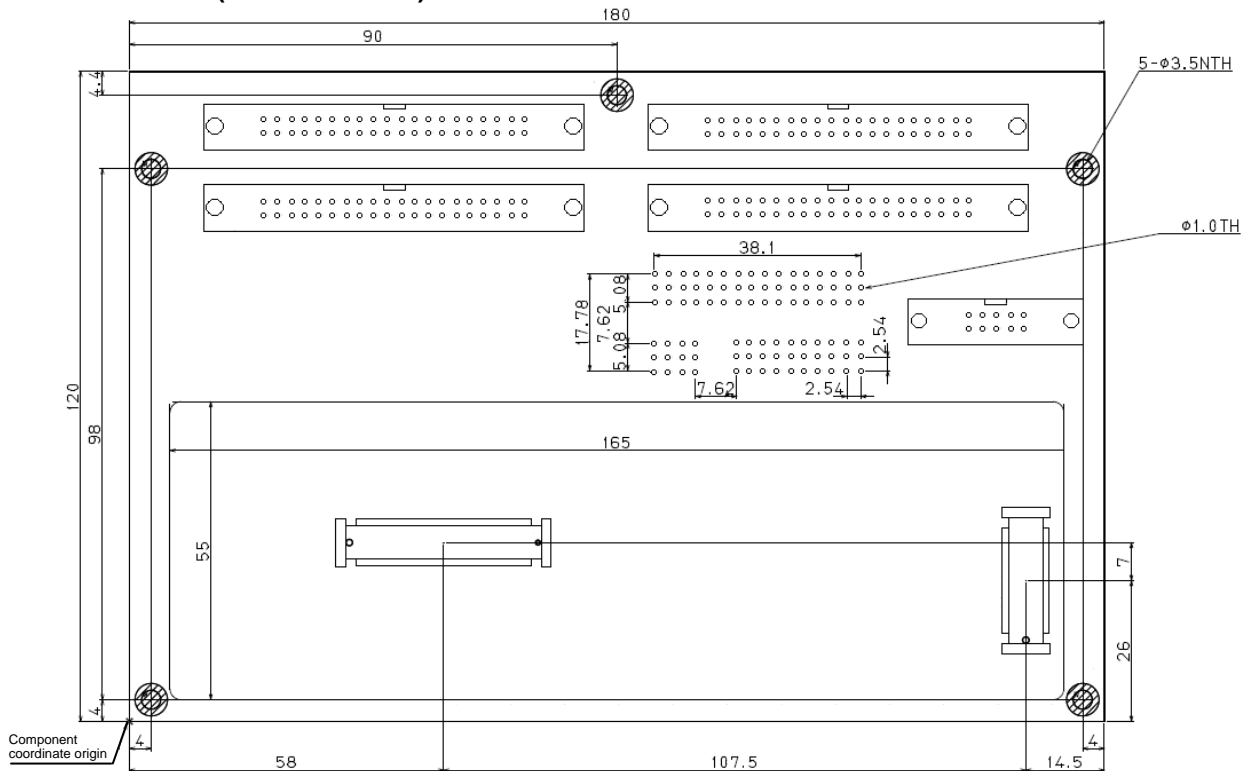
S5U1C6F632T2 interface board dimensions
